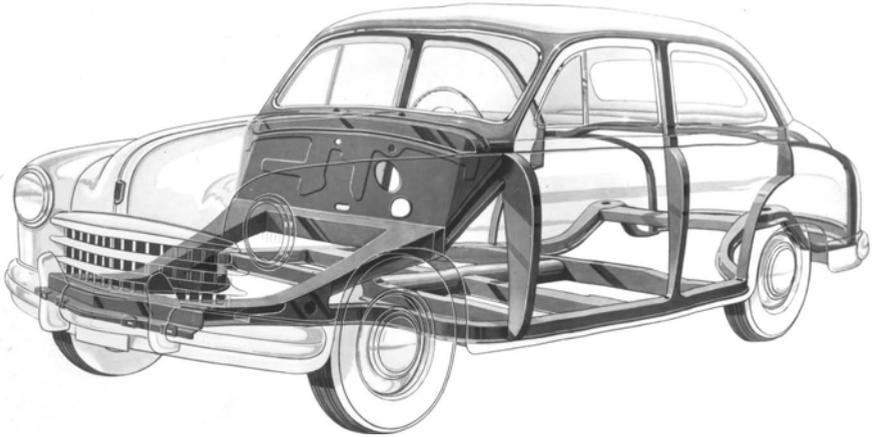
A more conventional example of unitized body is the 1950 FIAT 1400. All steel panels are shaped in such a way as to build a rigid beam at all junctions, surrounding doors, floor and trunk. All these beams, darkened in the picture, build-up a space frame.
